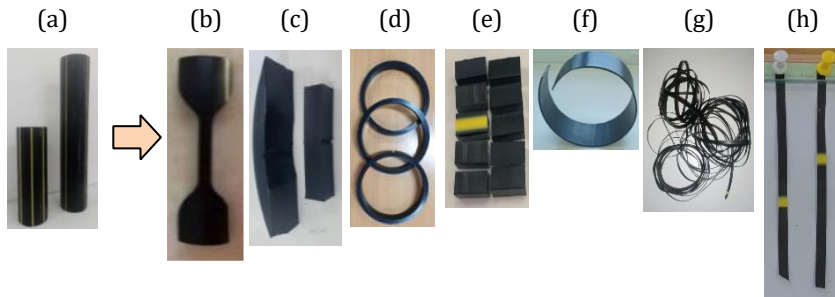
Diverse testing specimen geometries machined from HDPE pipe
